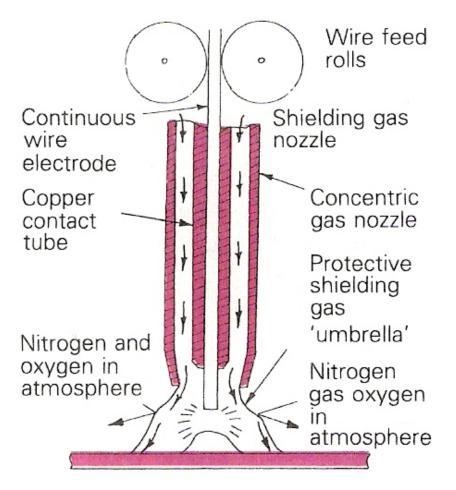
Diagram of Welding Nozzle and Gas Shield for Metal Arc Gas-Shielded (MAGS) Welding
